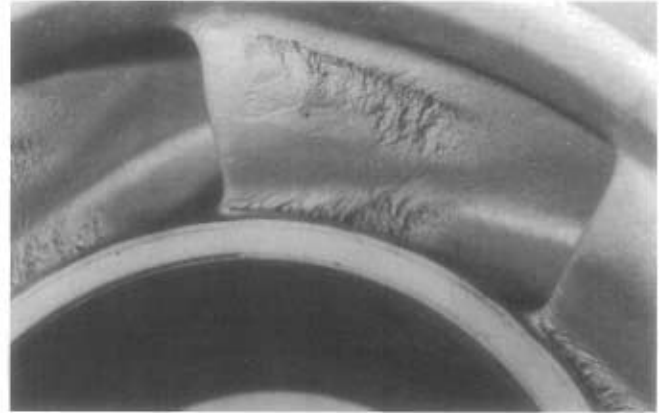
Mild cavitation damage on a centrifugal pump impeller vane
